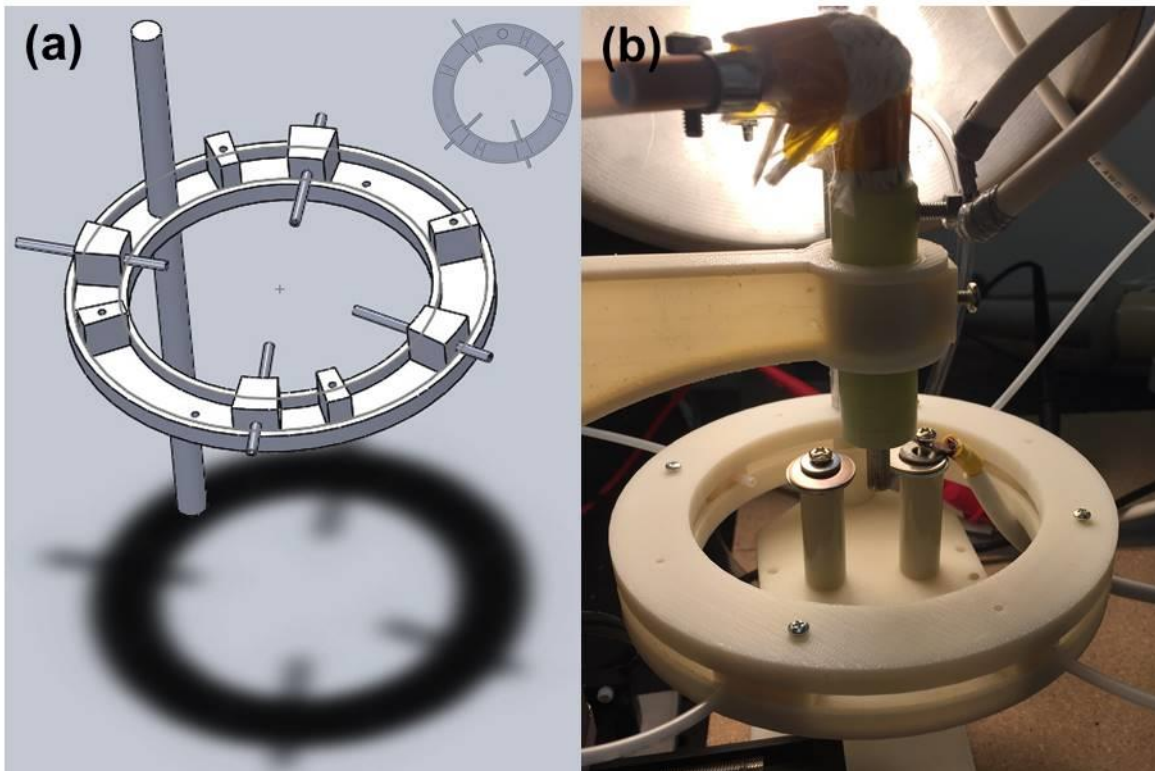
Secondary gas injection system with its (a) top and open cap view and (b) 3D printed assembly in the lab setup.
